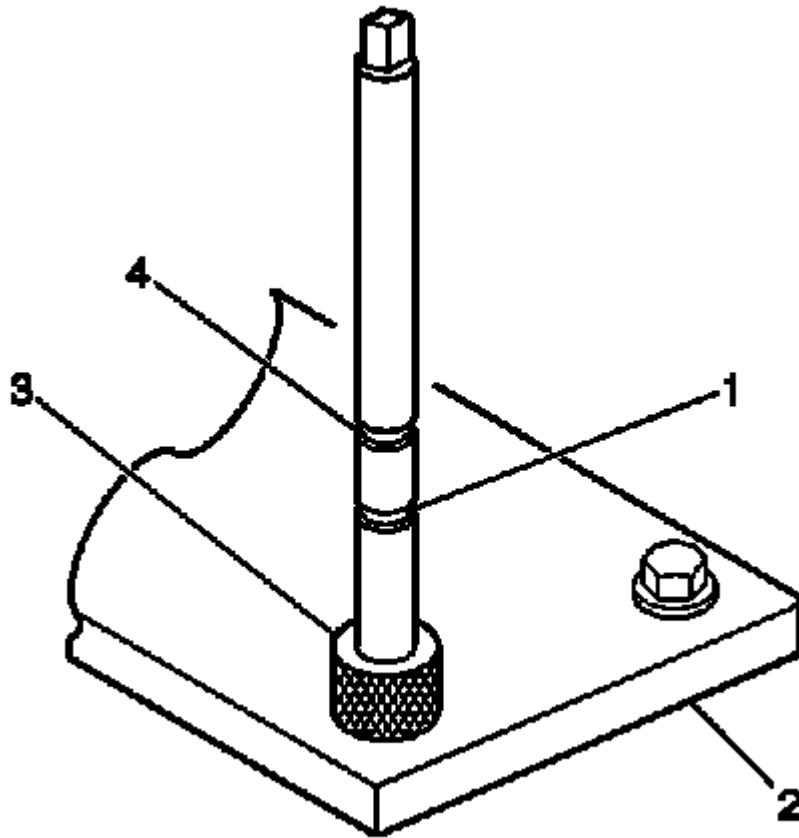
View Of Tap Upper & Lower Marks, Fixture Plate & Bushing
